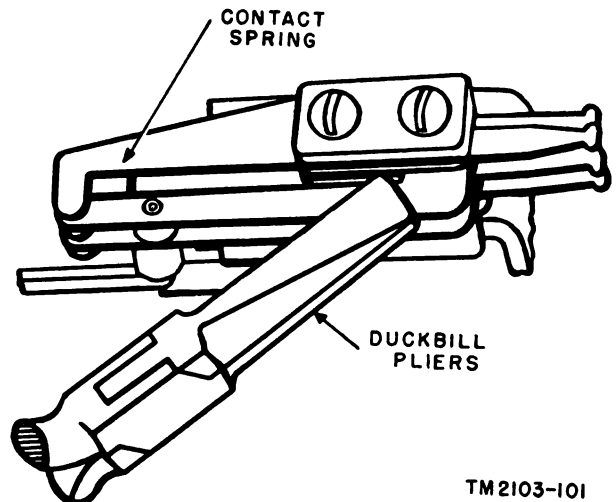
Removing kink in relay contact spring with duck-bill pliers.
